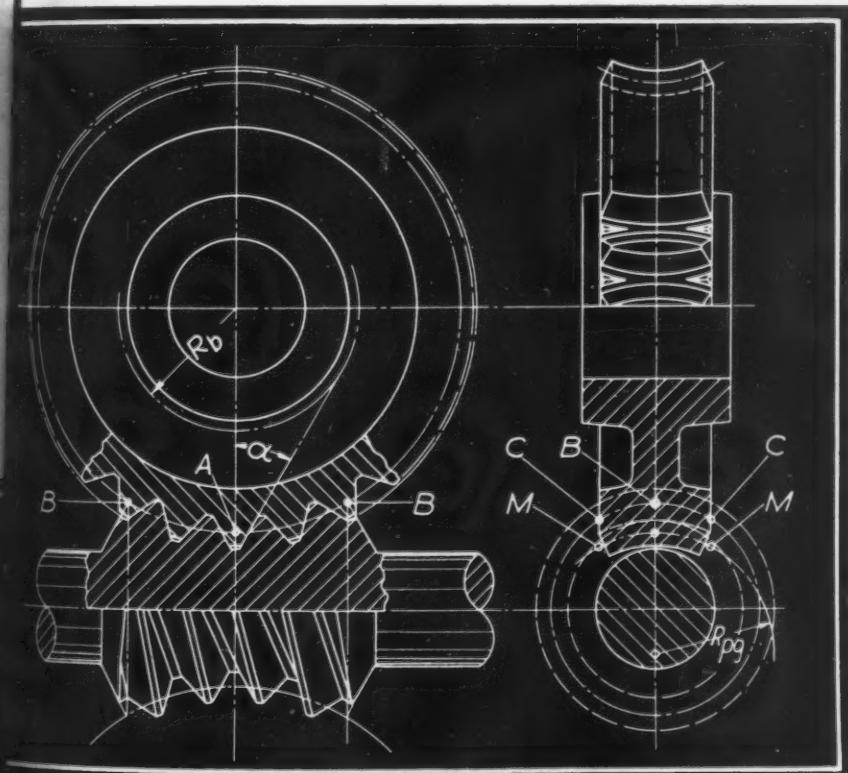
Left—Drive with modified gear has complete tooth contact over full length of worm in center plane
